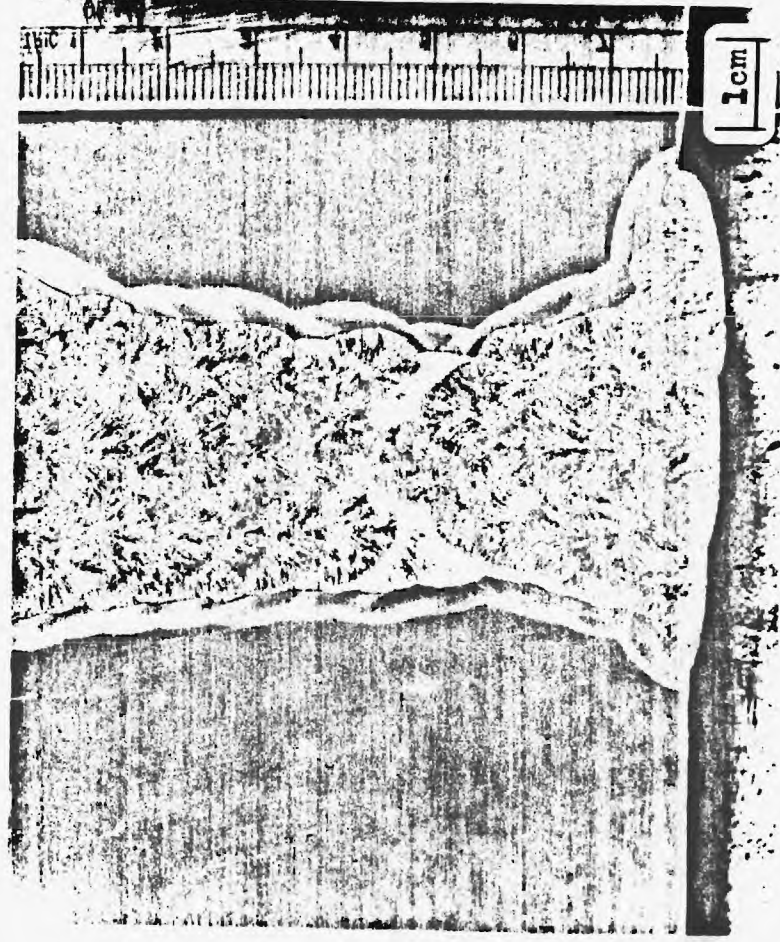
Macrograph of lower half of weld in Fig. 15
